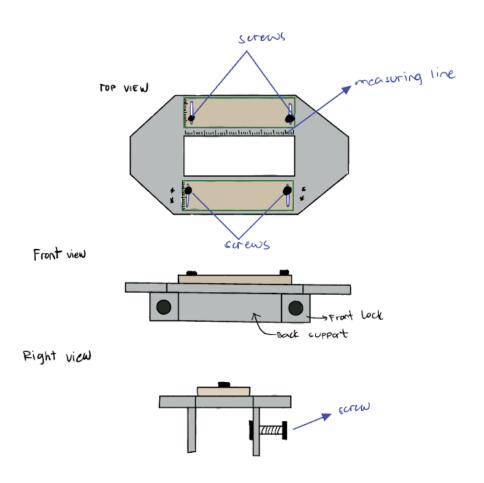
Jig Design Concept Adjustable Back Set with Measuring Line
